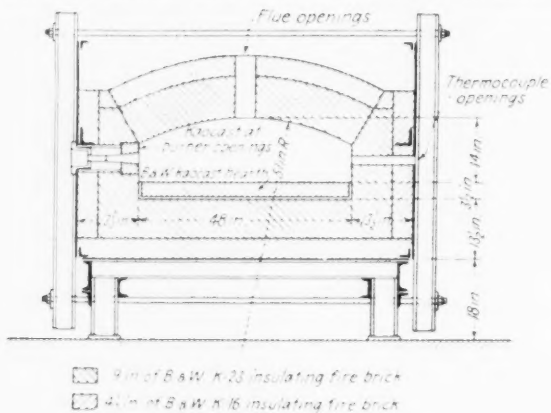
End section through one of the 50 ft. steel wire or rod patenting furnaces. Use of lightweight B. and W. insulating firebrick is shown.
